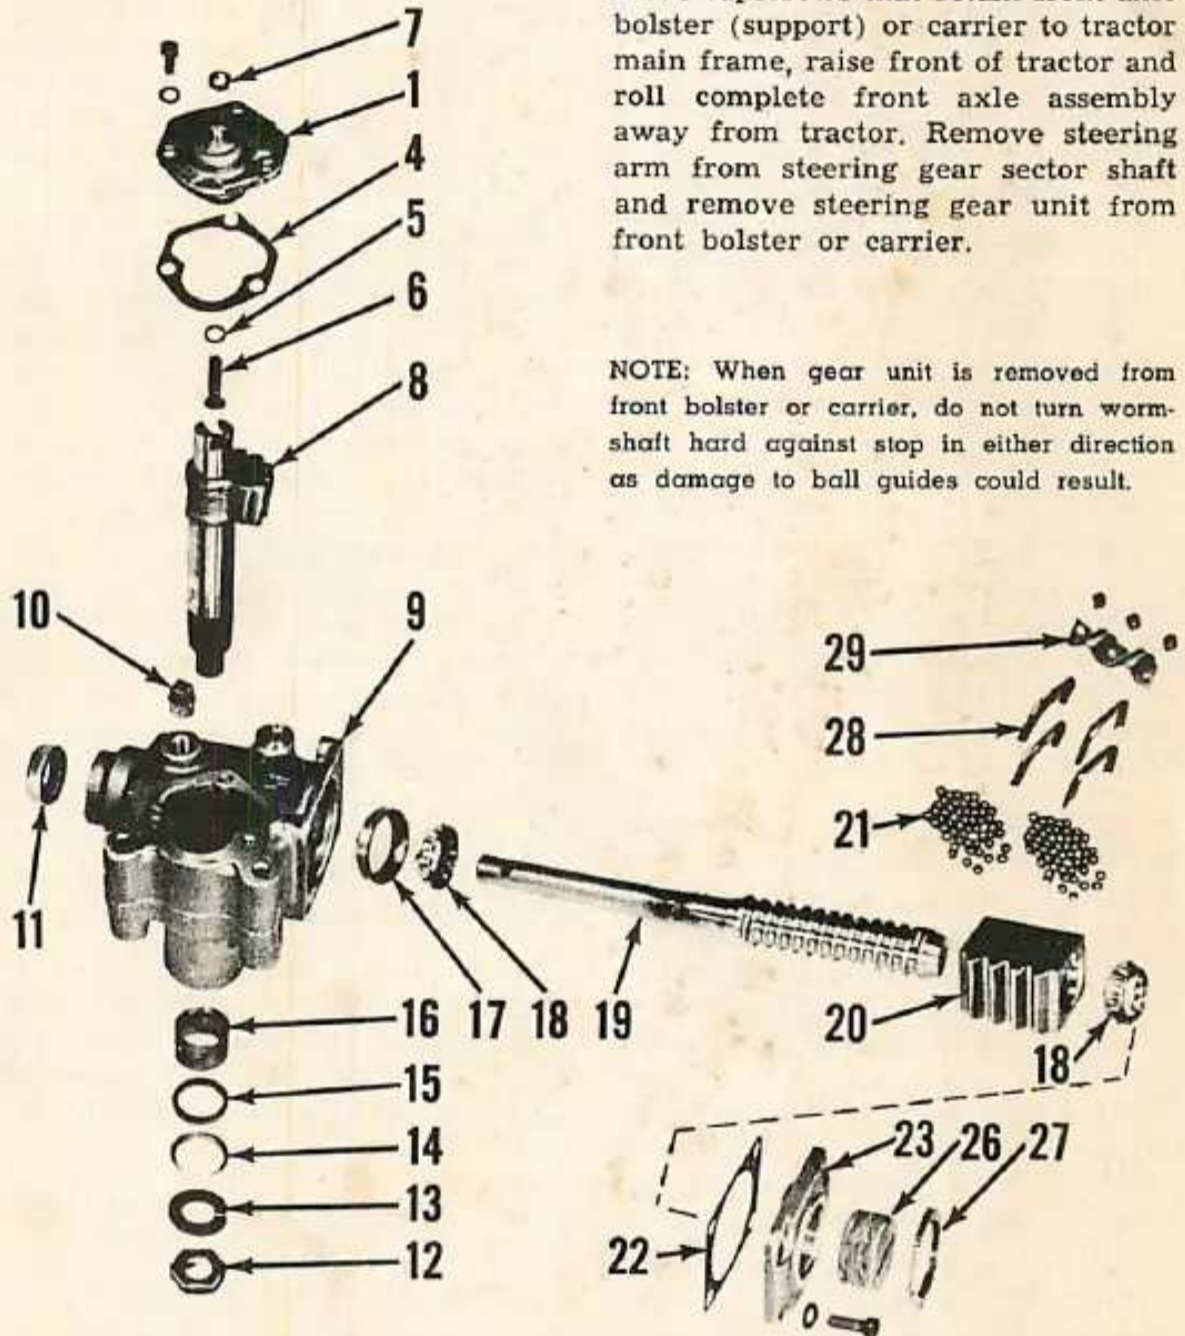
Exploded view of Saginaw steering gear assembly used on manual steering models.
